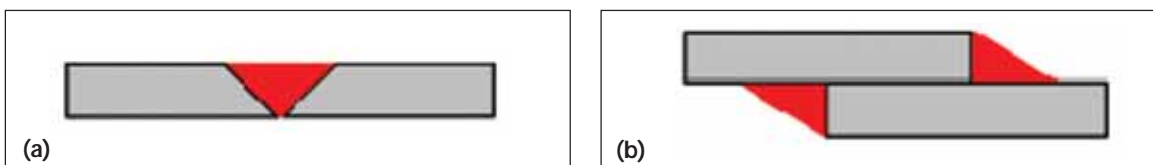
Schematic of recommended method of smoothing butt (a) and lap (b) welds to facilitate sanitizing of equipment
